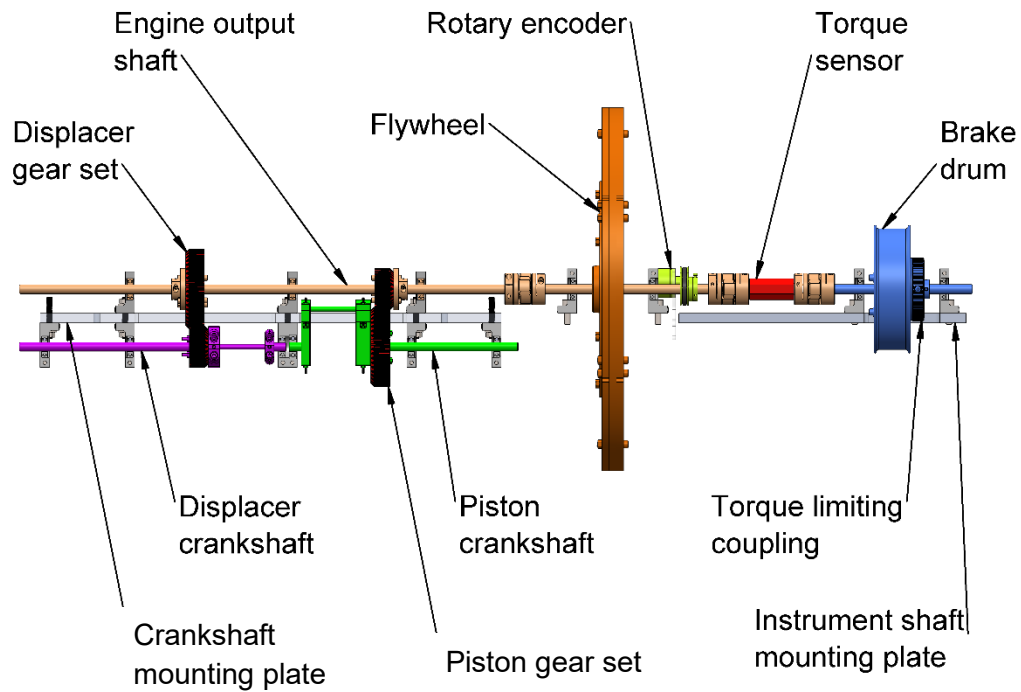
Profile view of the EP1-M engine drive mechanism and instrumentation output
